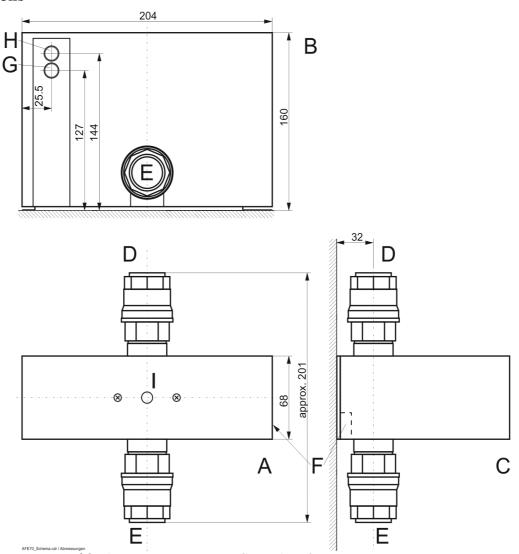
Dimensions of the Automatic Purging Units Series AFE70
